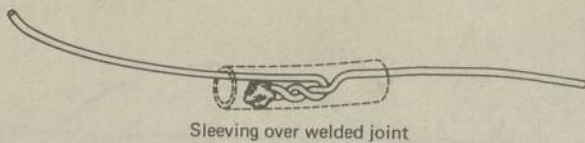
Welded joint with sleeving of insulation.
